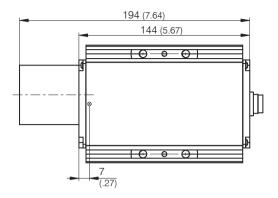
Dimensional drawing sensor, dimensions in mm, not to scale
